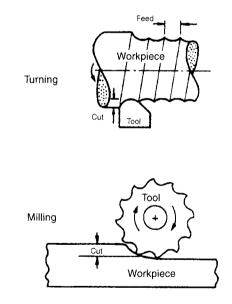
Machining: turning (above left) and milling (below). The sharp, hardened tip of a tool cuts a chip from the workpiece surface.
